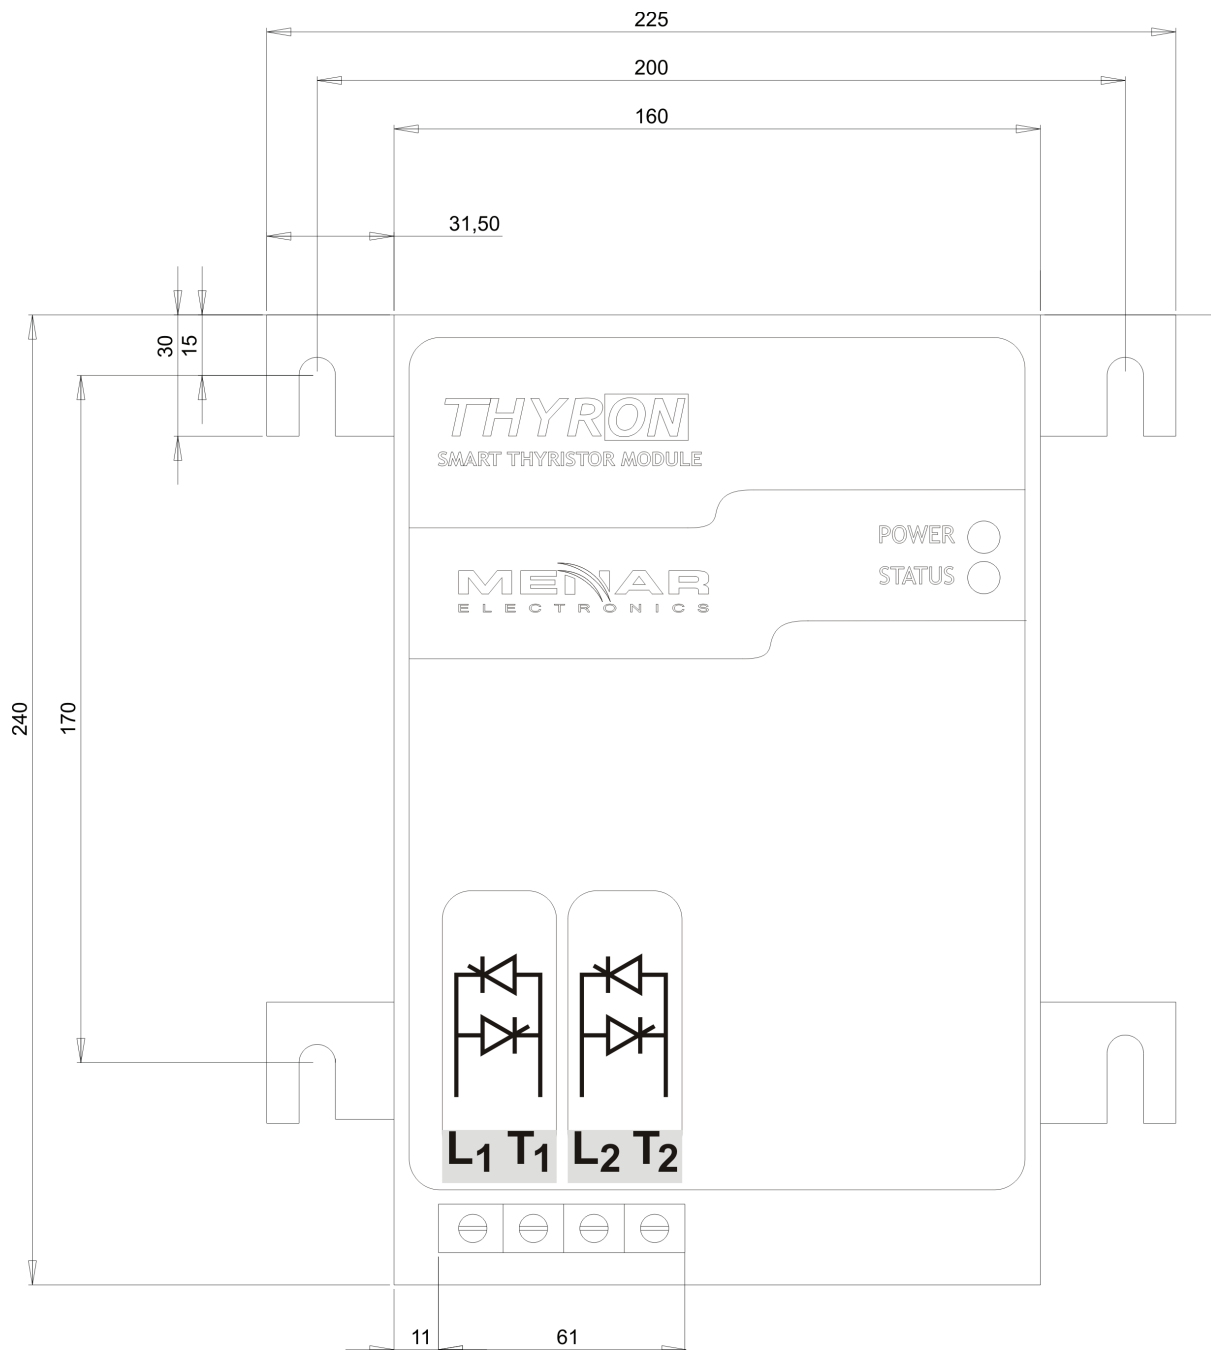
Mechanical drawing for Thyron® 3P2-50
